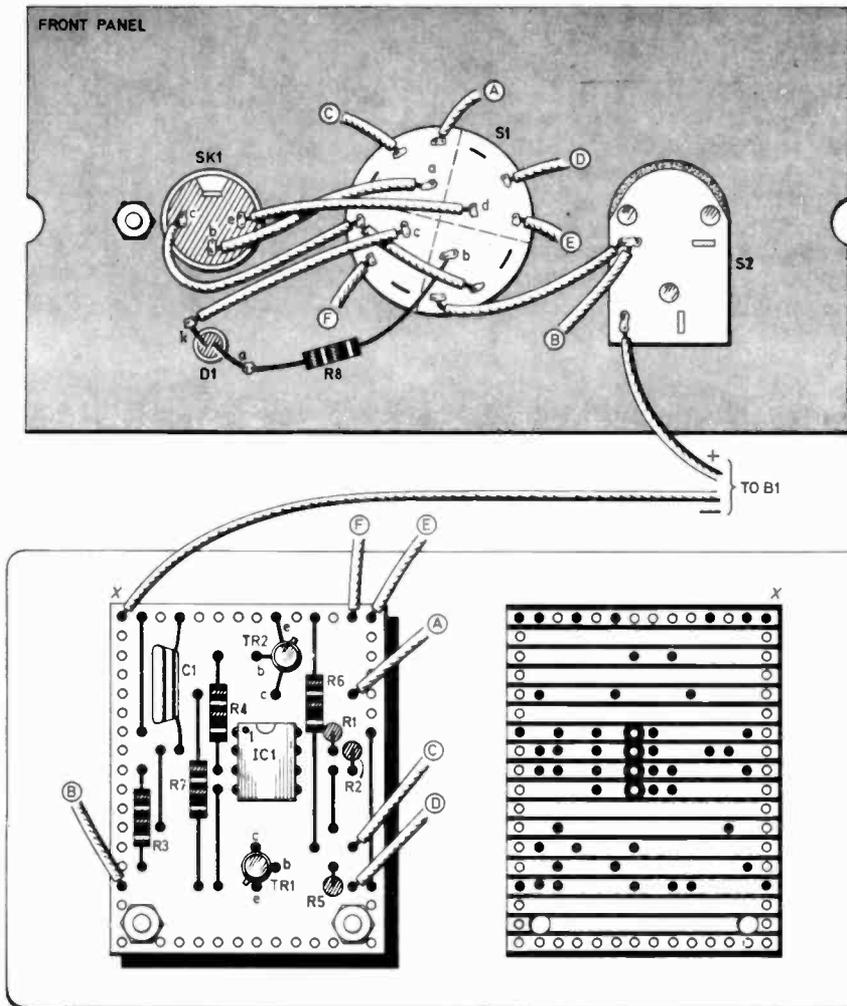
Interwiring details for the front panel, circuit board component layout and underside of the stripboard showing breaks in the copper tracks.
